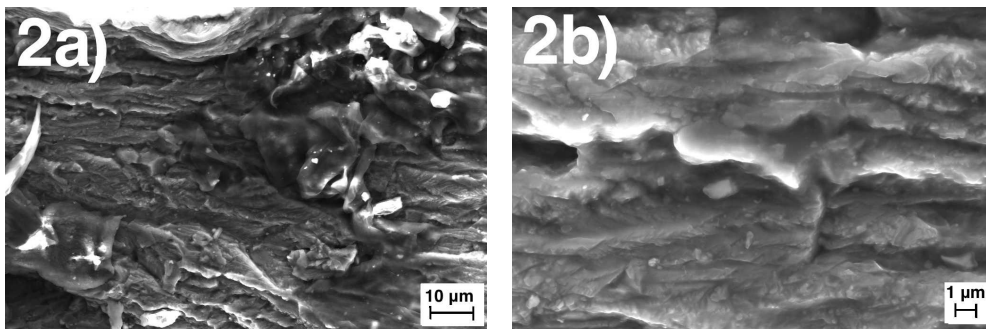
Fracture surface of AA6082.50-T6 as welded. Some oxide layer from the crack closure movement and river patterns to the left (2a) and one internal pore shown to the right (2b).
